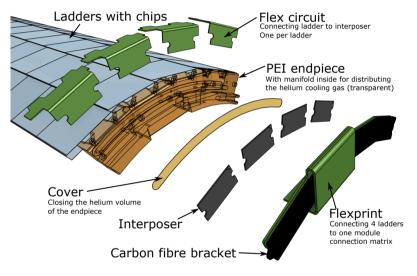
Exploded view of the outer layer module assembly. The end piece region provides a manifold for distributing the helium cooling gas and holds the flexible circuits to connect ladders to a single electrical connection matrix on the bottom.
